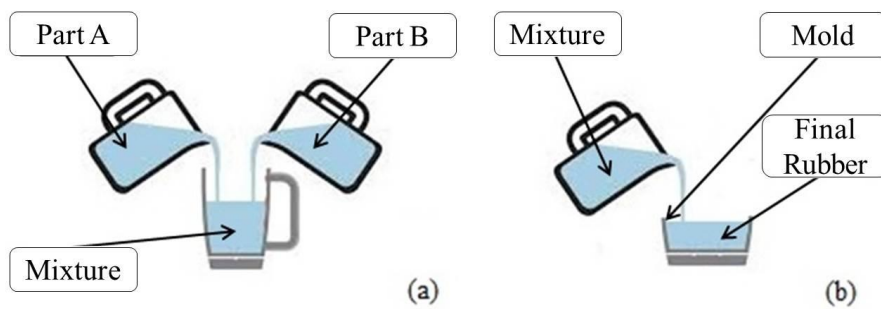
The Silicone Fabrication Process, (a) mixing and (b) Molding
